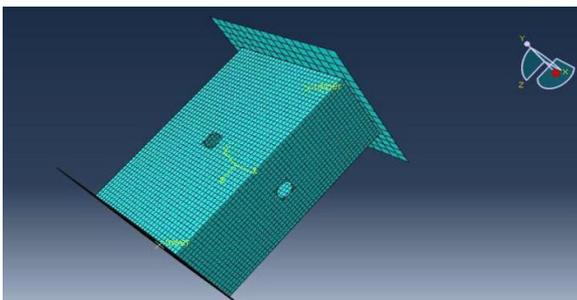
Meshed CAD Assembly (Test no.4)
